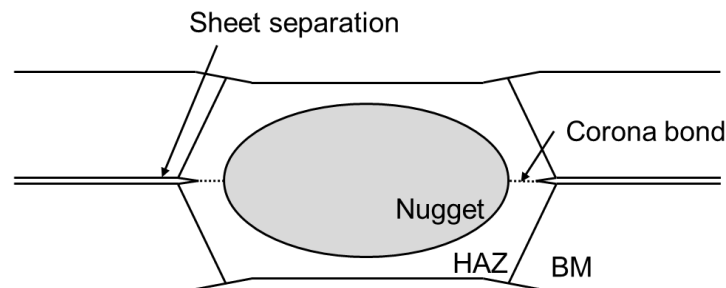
Schematic of resistance spot welding joint.
